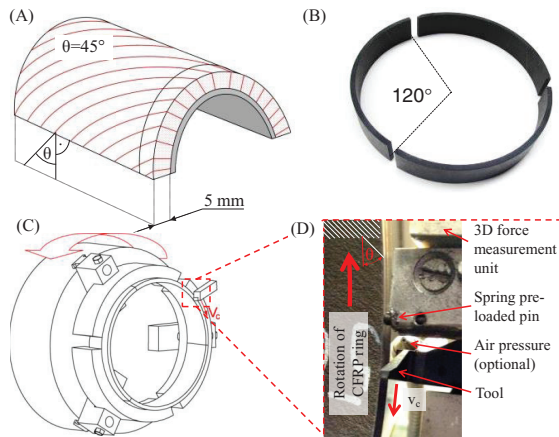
(A) CFRP workpiece with exemplary fibre orientation  $\theta=45^\circ$ ; (B) CFRP segments prior to machining; (C) schematic illustration of ring-shaped workpieces clamped into machine tool as in [23] and (D) detailed view of contact conditions during machining.
